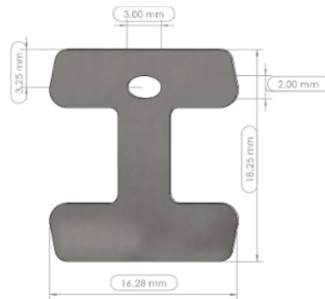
Flat cutout of matrix courtesy of the Spring 2026 Team.
